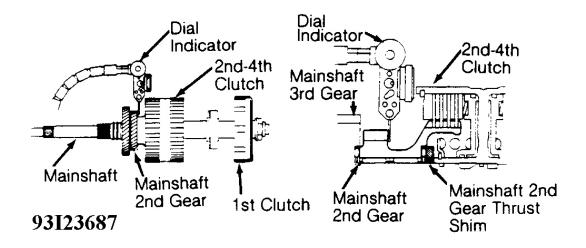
Checking Mainshaft 2nd Gear Clearance Courtesy of AMERICAN HONDA MOTOR CO., INC.
